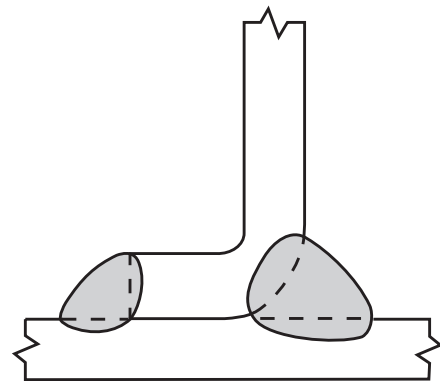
(Continued)—Double-Groove Weld Types
